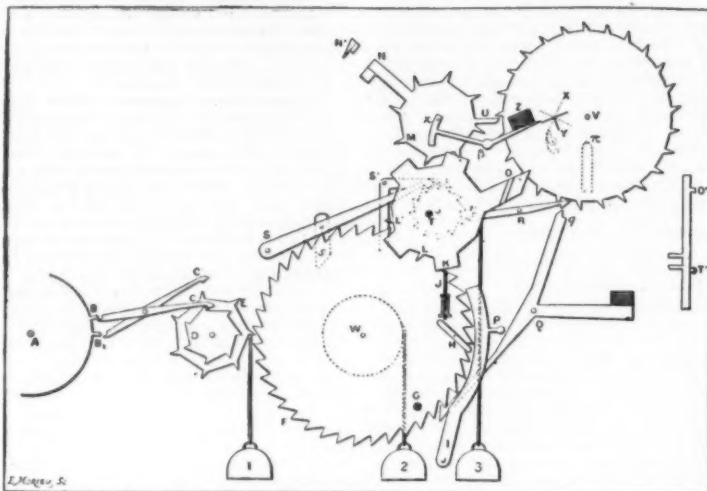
COMPLETE SCHEME OF MECHANISM.
